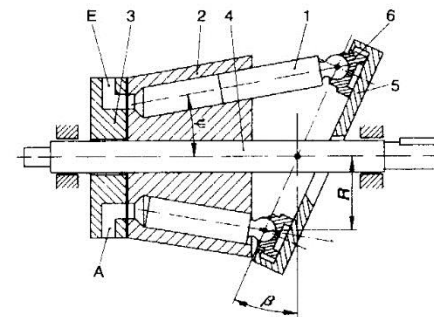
Axial piston pump of swash-plate design with pistons arranged inclined to the shaft axis (1) Piston (2) Cylinder block (3) Valve plate (4) Drive shaft (5) Swash plate (6) Slipper. E inlet, A outlet.
